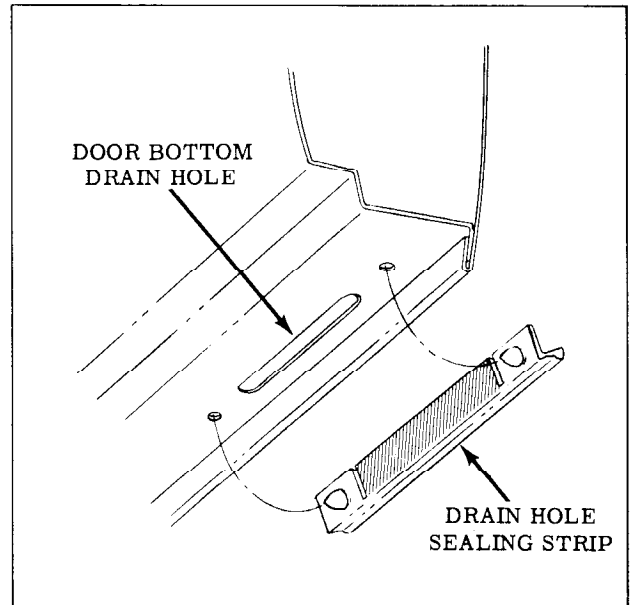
Door Bottom Drain Hole Sealing Strip
